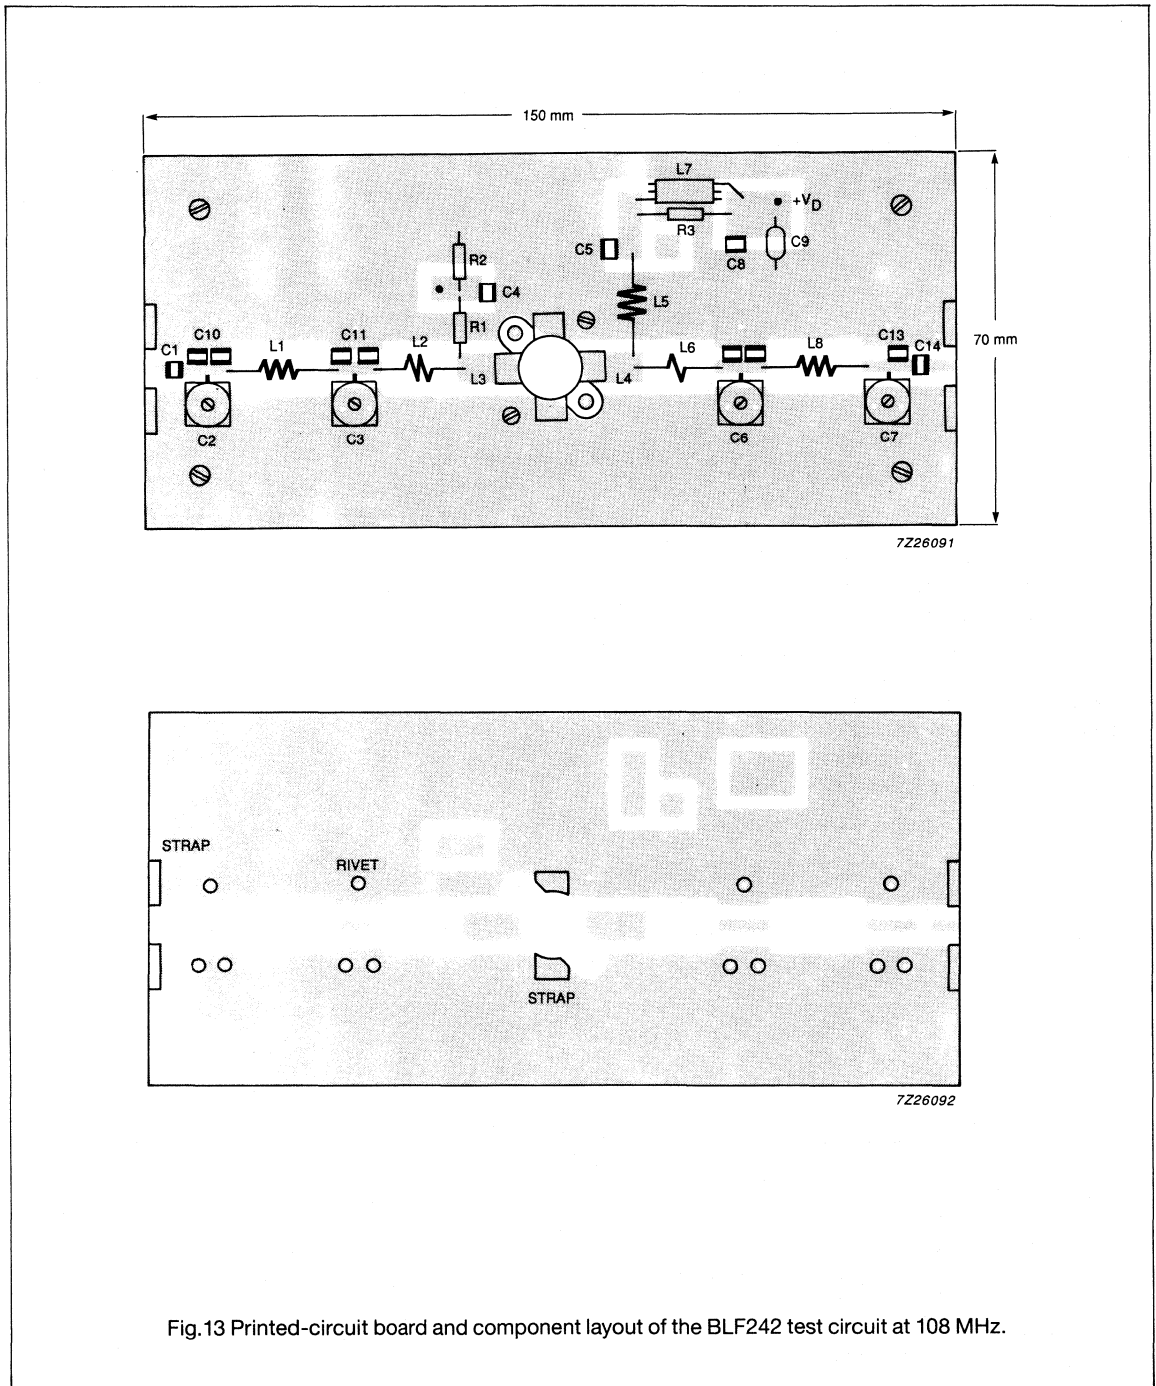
Printed-circuit board and component layout of the BLF242 test circuit at 108 MHz.
